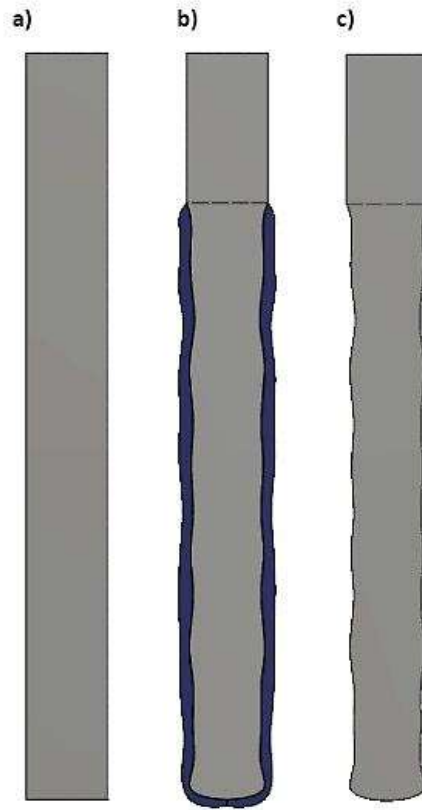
Schematic cross section view of agitated soldering samples. a) showing unaffected sample, b) worn sample with aluminum residue and c) worn sample with aluminum removed
